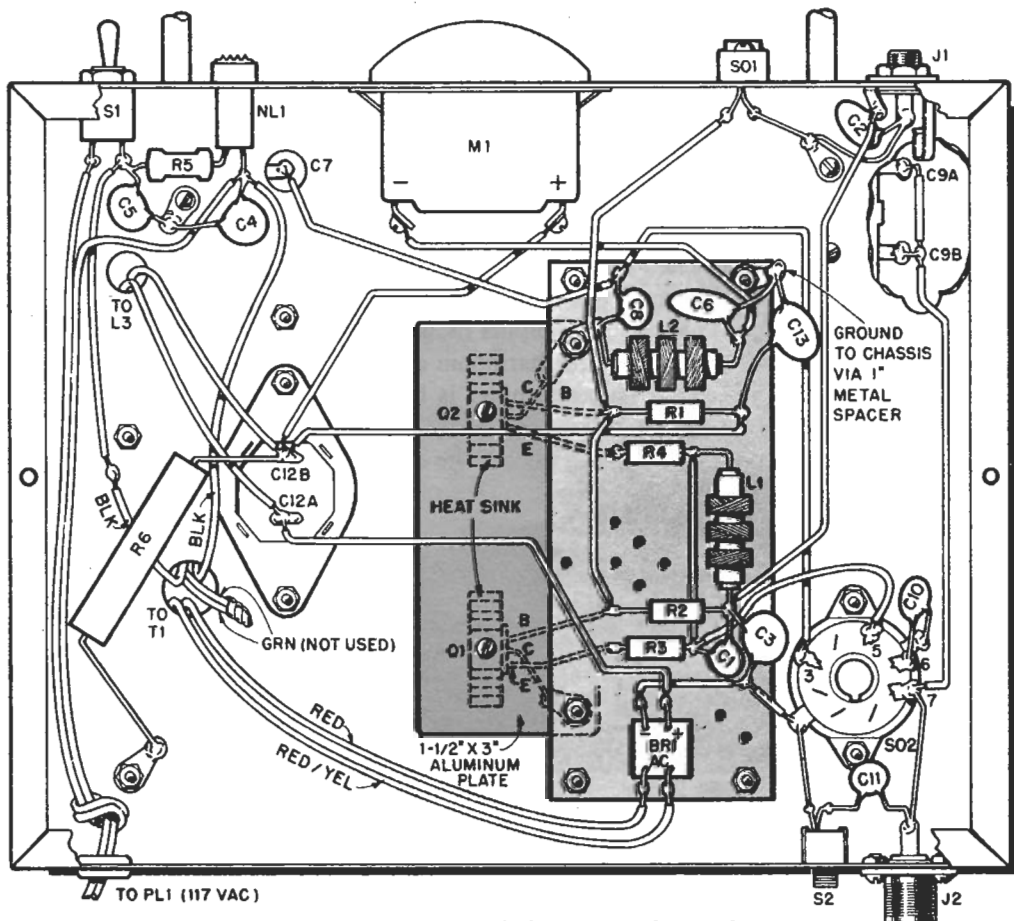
Area shown in color is 1½ x 3-in. piece of aluminum—a heat sink on which Q1 and Q2 are mounted. Gray area is perforated circuit board. Parts are grounded to the chassis by a 1-in. spacer at upper right corner of the board.
